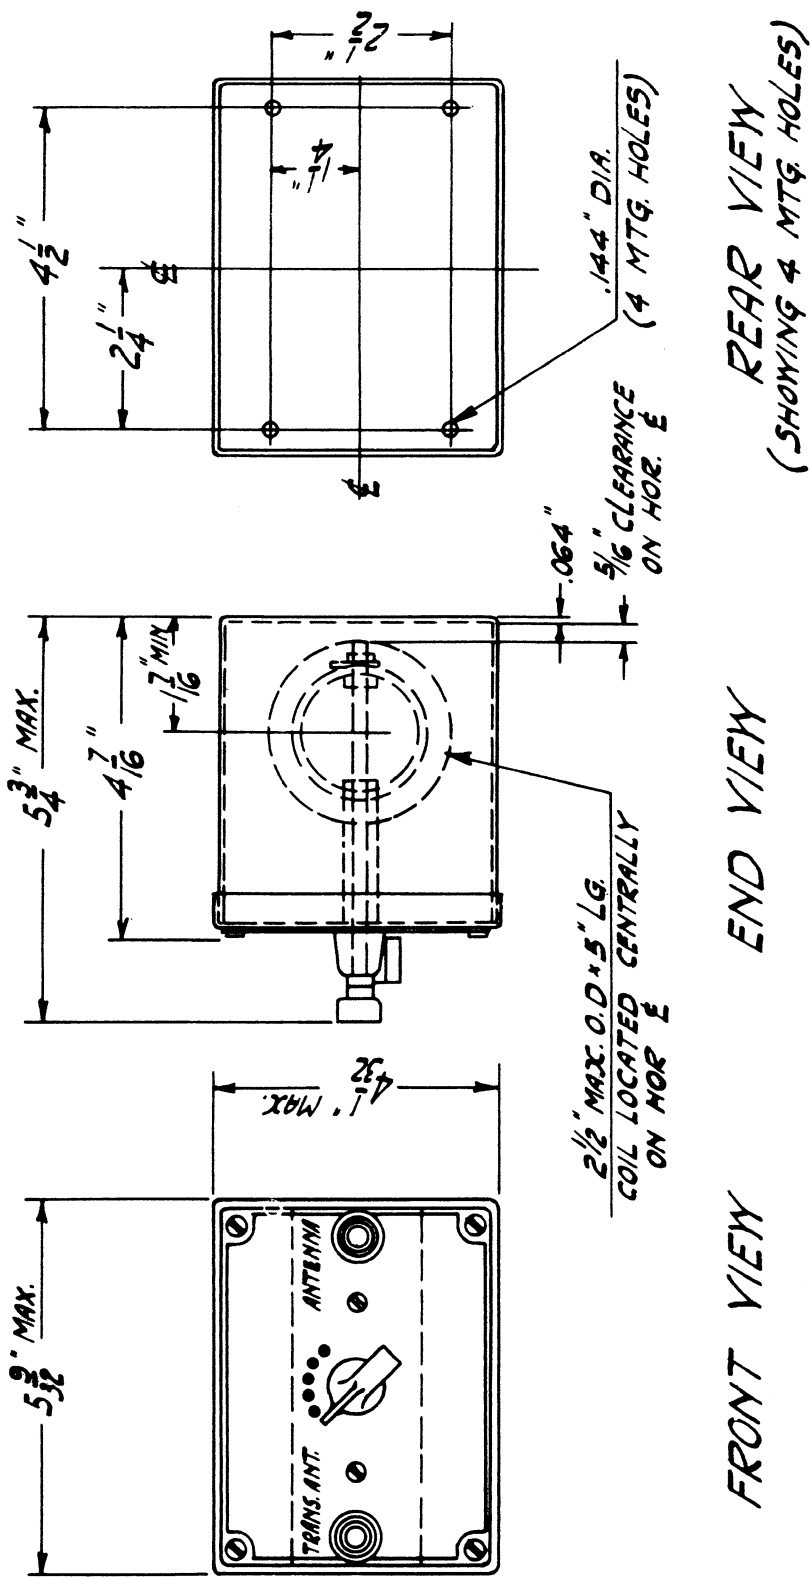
OUTLINE DIMENSIONS TRANSMITTER CONTROL UNIT
